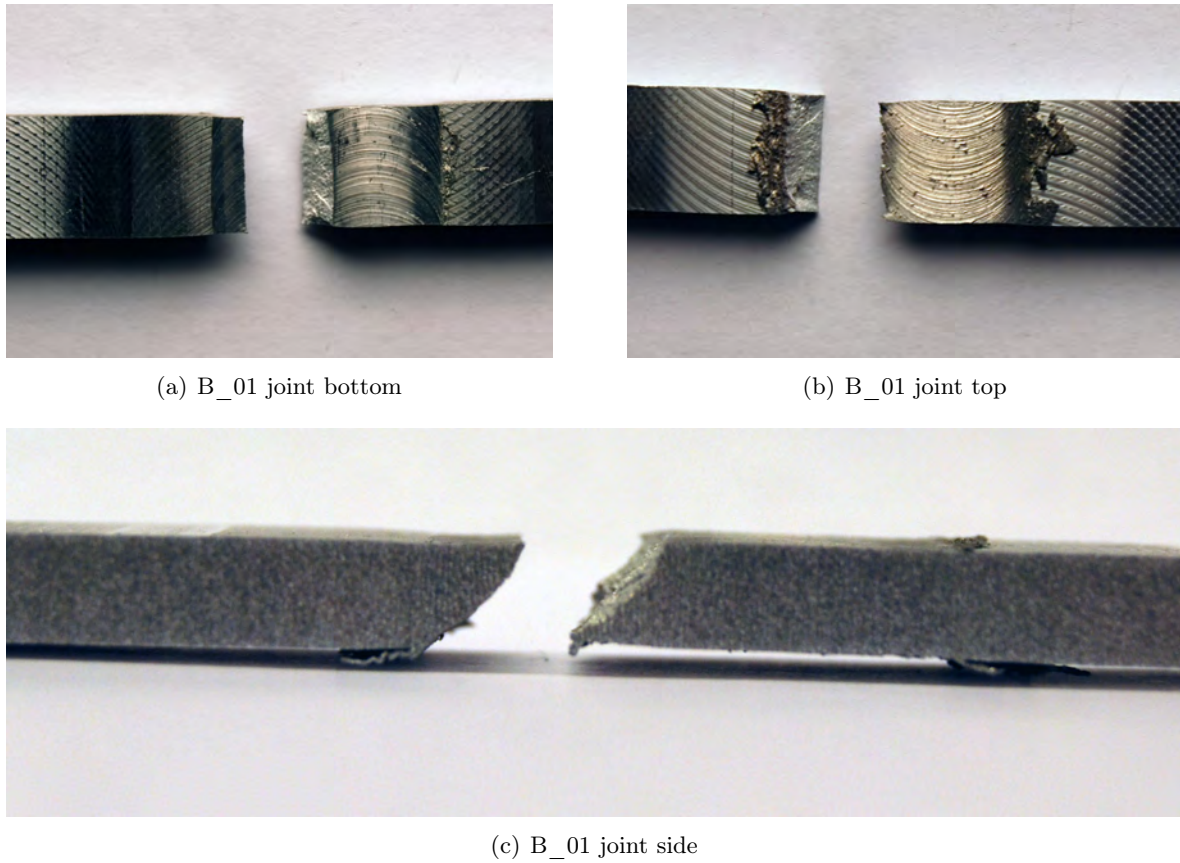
Fracture appearance of the welded tensile specimens B_01
